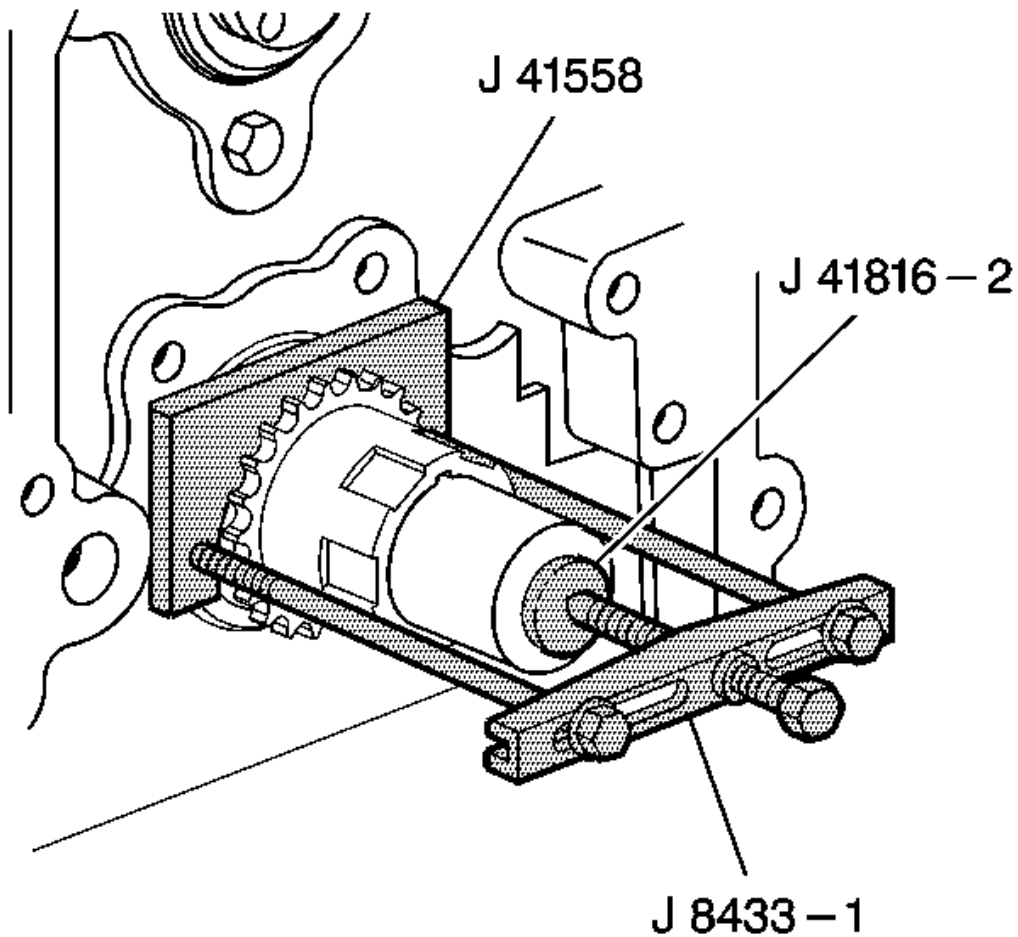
Removing The Crankshaft Sprocket Using J 8433-1, J 41816-2 & J 41558
